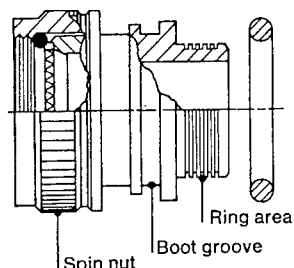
Heat-Recoverable Ring Cable Termination Adapter (Drawing Courtesy of Raychem Corp.)
